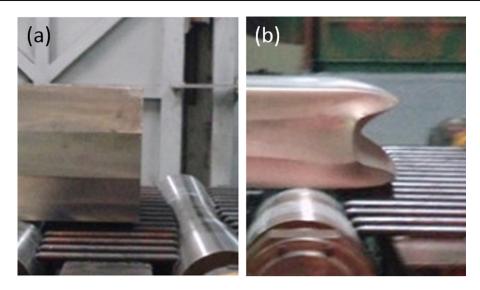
End shape of aluminum alloy thick plate: (a) before rolling; (b) after 2nd pass.
